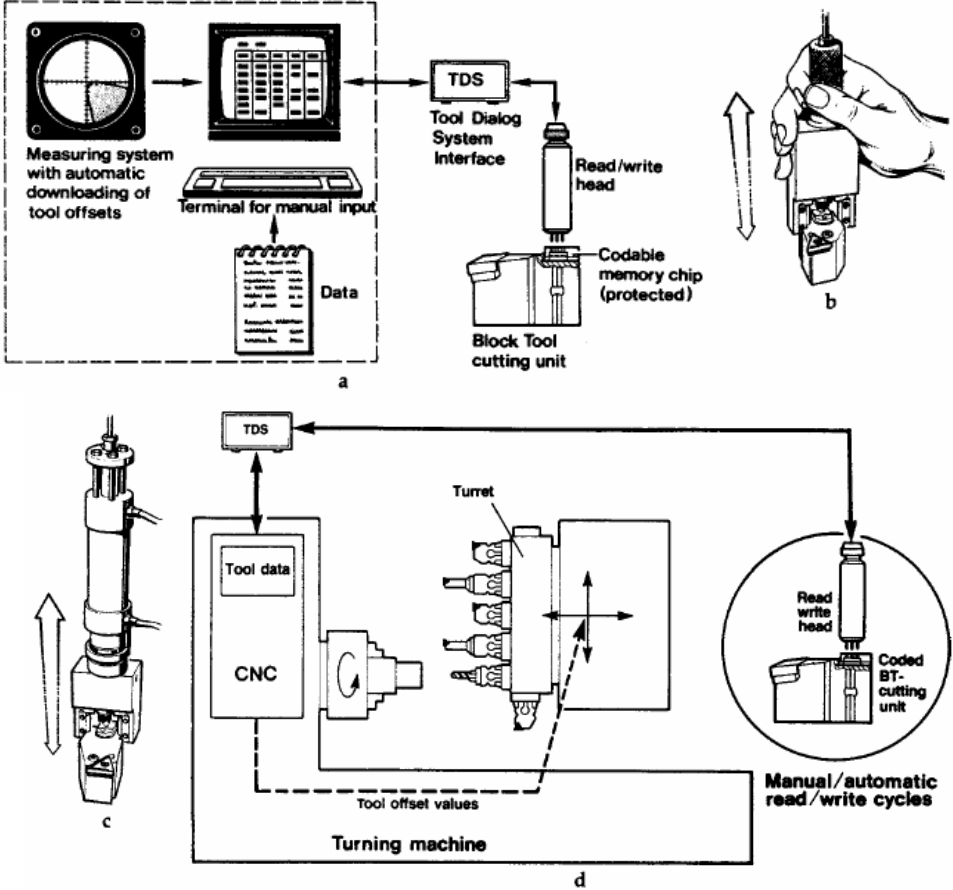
Tool data processing employing modular quick-change tooling on a turning center, via the ‘intelligent/tagget’ tooling concept
